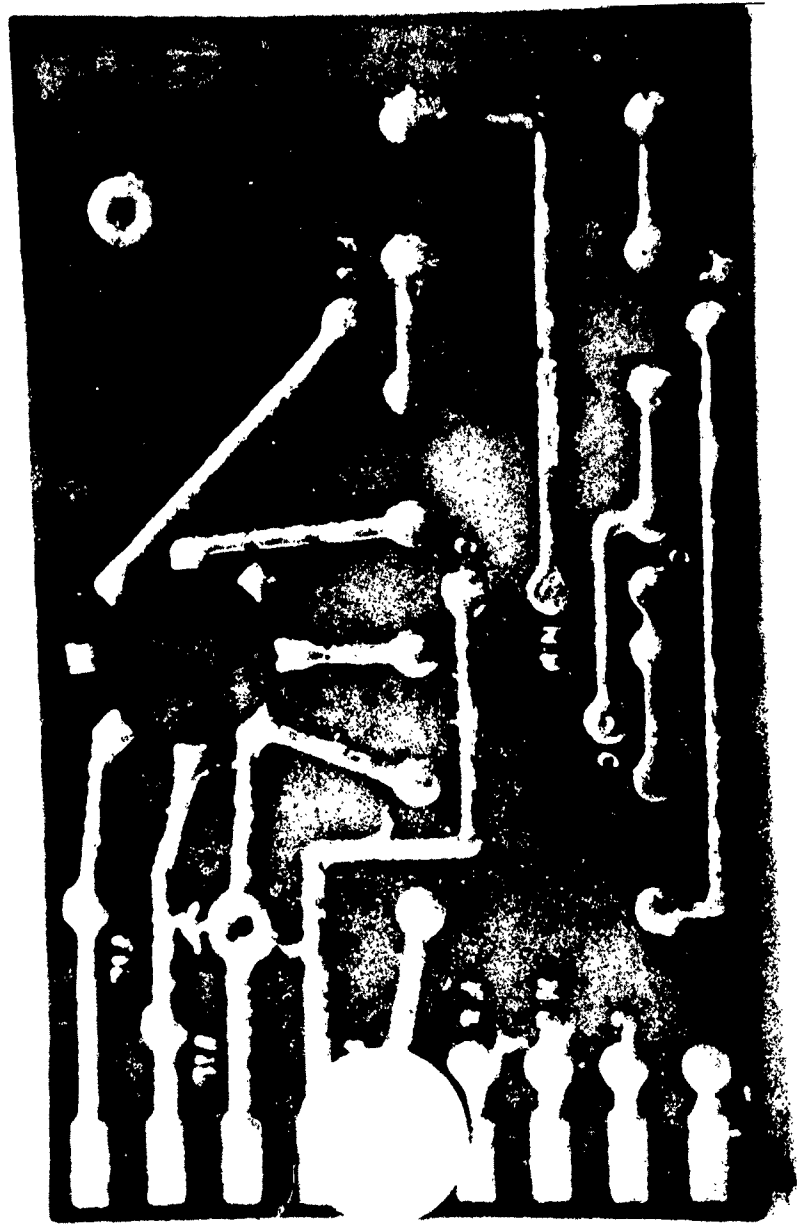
Board No. 40 from Blister Test No. 7 After Soldering.
